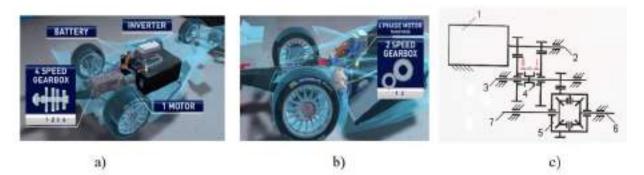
Transmissions for Formula E cars: a) and b) - gearbox variants with different number of gears; c) kinematic scheme of a simple gearbox with two gears for transverse engine: 1 – electric motor; 2 – primary shaft; 3 – secondary shaft; 4 – switch coupling; 5 – differential; 6, 7 – differential axles (25)⁶⁵
